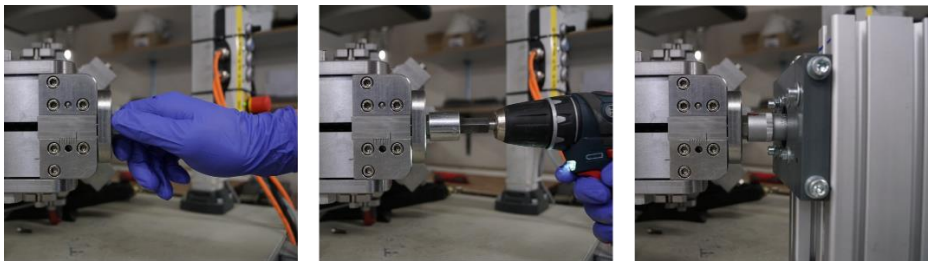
Adjusting the cross-section by (a) hand, (b) cordless screwdrivers, and (c) stepper motors.
